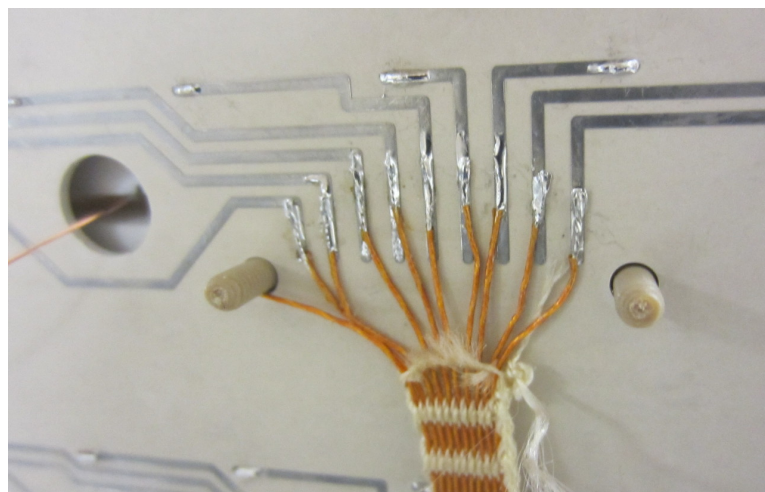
Close up of kapton ribbon cable soldered to signal readout board.
